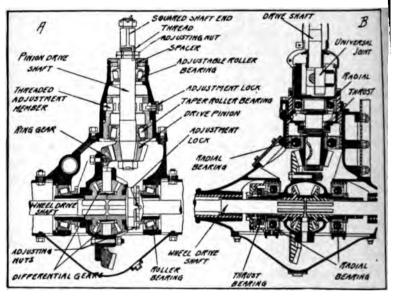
Sectional Diagrams of Bevel Drive Gears, Showing Method of Adjusting the Gearing.
